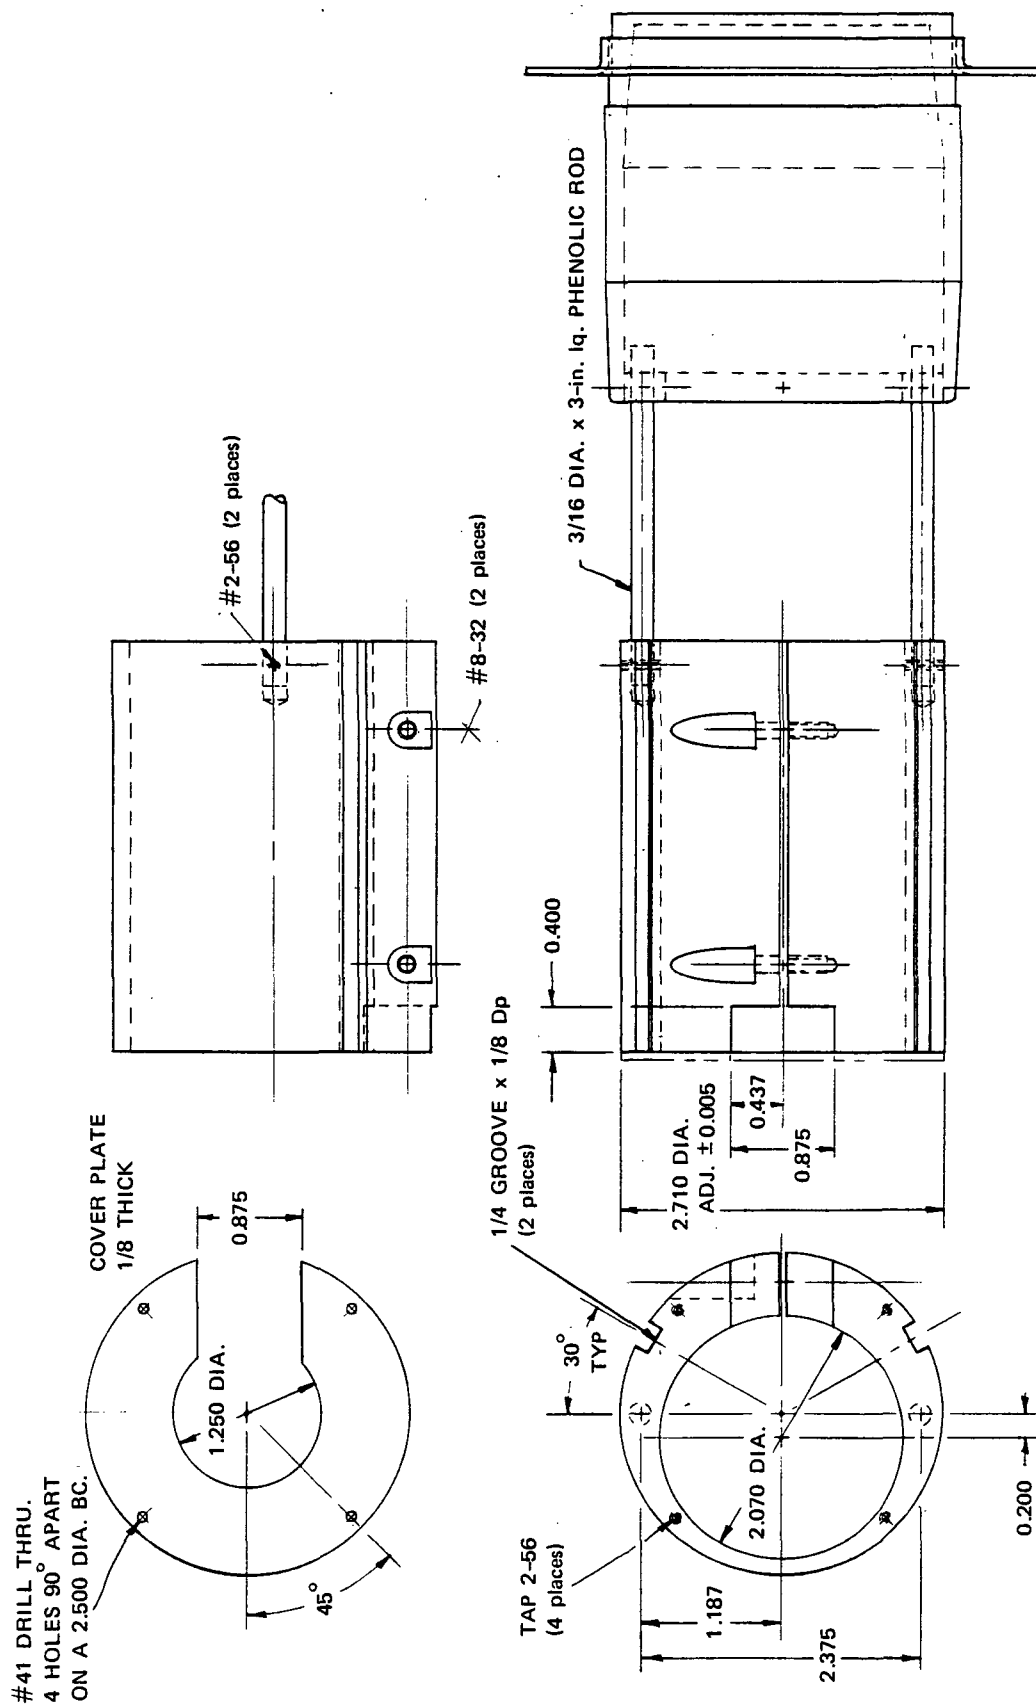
TUBE MOUNT AND BASE ASSEMBLY SHOWING KEY DIMENSIONS. All dimensions are in inches.
